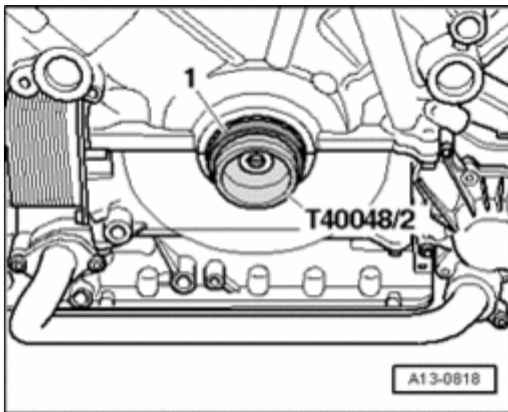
Placing Pull Sleeve T40048/2 On Crankshaft And Sliding Seal Into Sealing Surface On Engine
